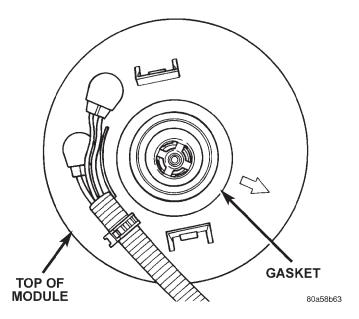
Fuel Filter/Fuel Pressure Regulator Gasket
